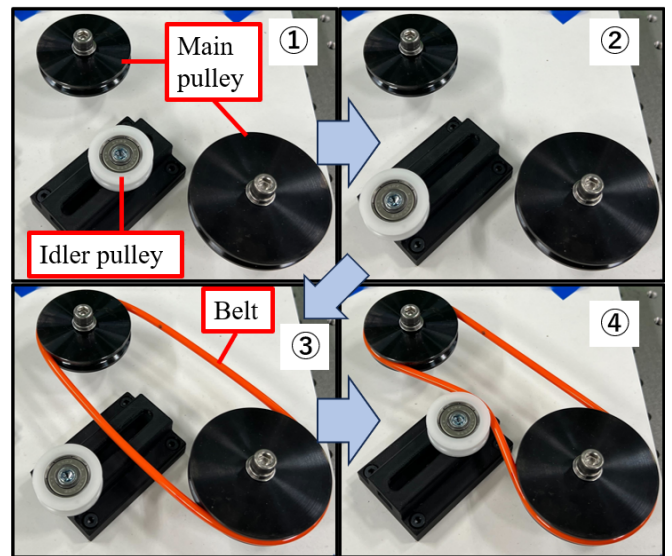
Belt drive assembly. There are two main pulleys and an idler pulley on the slider between them. First, removing the idler pulley, then hooking the belt to the main pulleys. Finally, moving the idler pulley to tension the belt.
